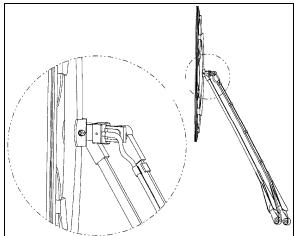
WINDSHIELD WIPER (MOTOR SIDE)
